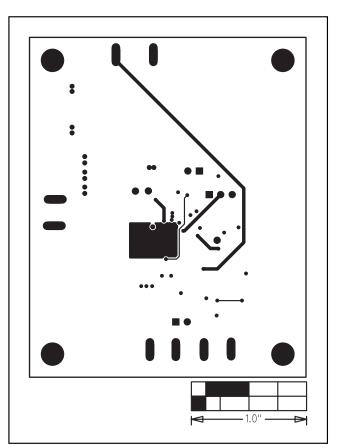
MAX16812 EV Kit PCB Layout—Solder Side
